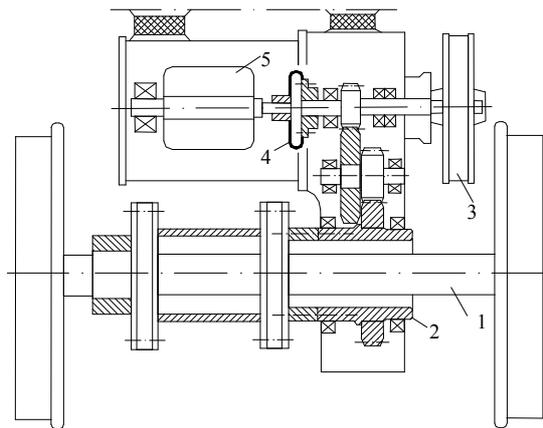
Scheme of the generator drive in a passenger car: 1 – wheel axis; 2 - entrance the hollow shaft of gear ; 3 – conducting pulley belt drive; 4 – flexible coupling ; 5 – flywheel
